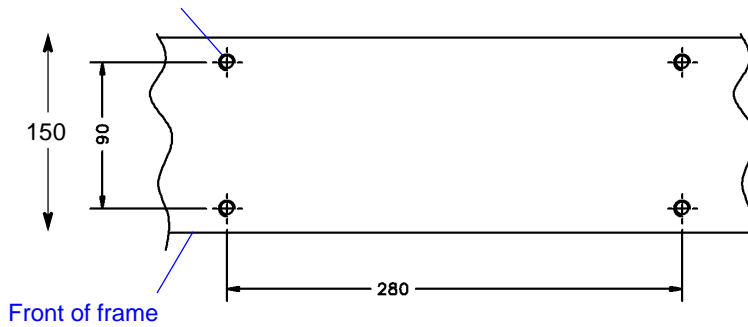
Series 5565, 5566, 5567 Extra Wide Configuration - Top Plate Mounting Dimensions
